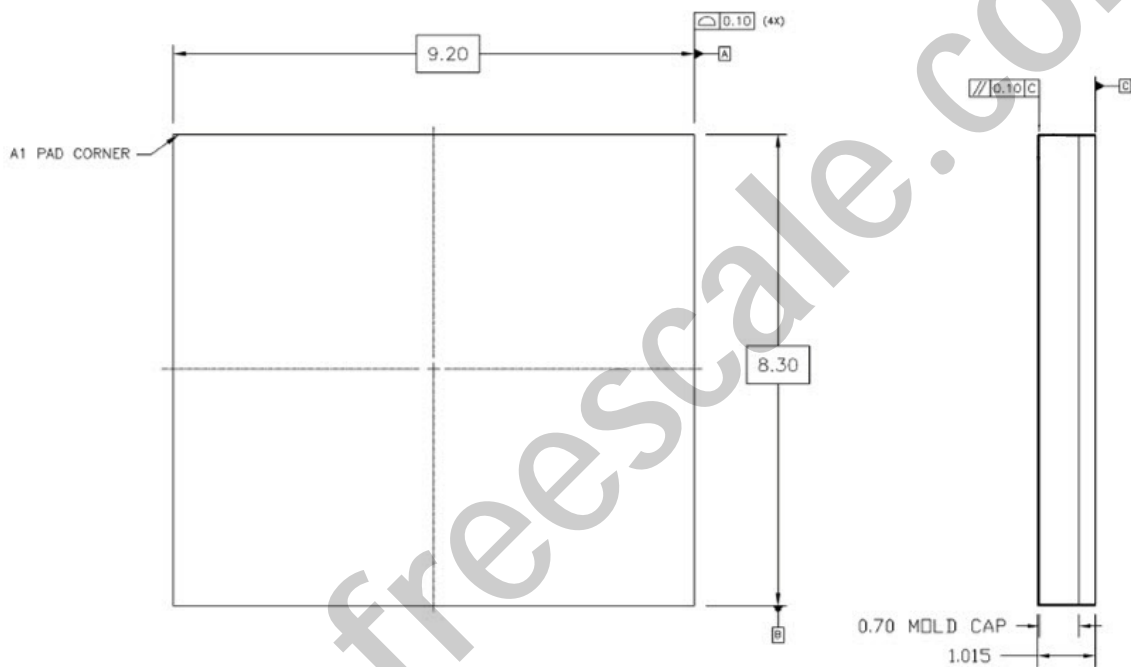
AR4100(P) Package Dimensions (Top and Side Views)
